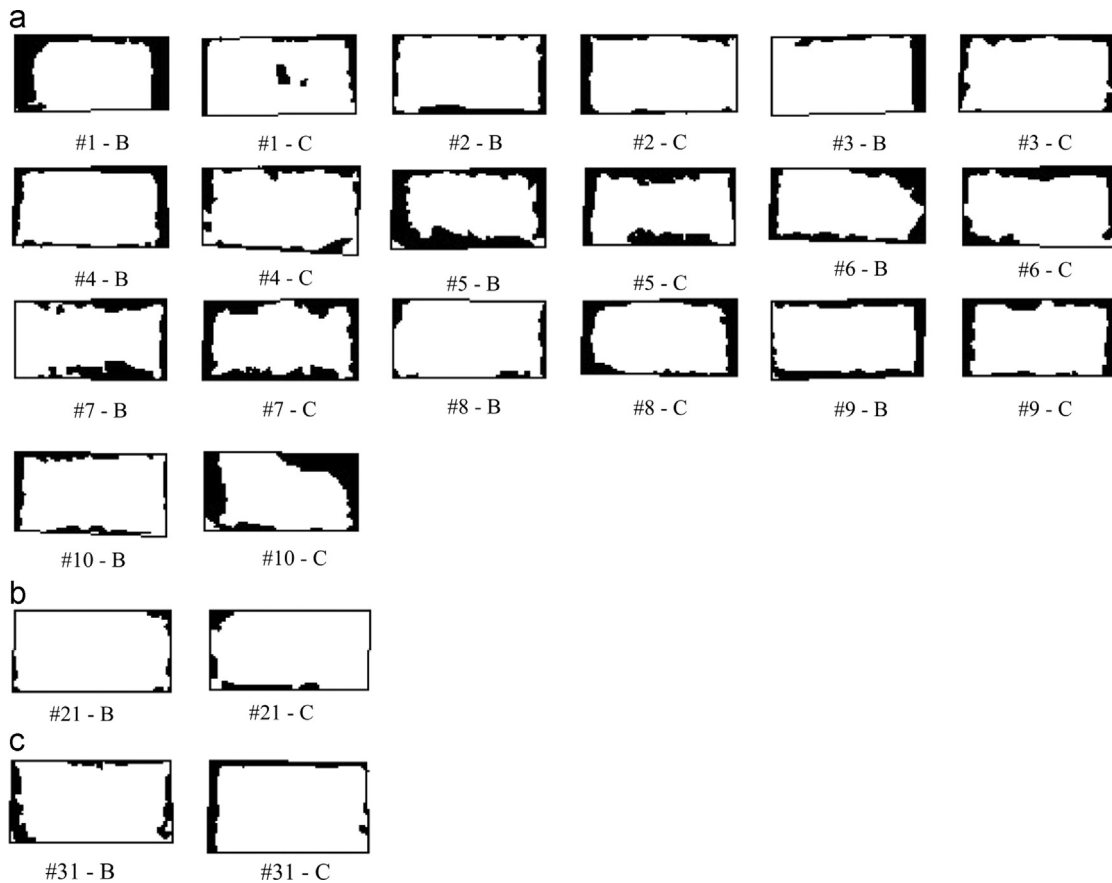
Binarized fracture surfaces. (a) Fracture surface images of 10 specimens at 293 K and 1 mm/min. Fracture surfaces of #1-B and -C were binarized from images in Fig. 6. (b) Fracture surface image of specimen with maximum apparent shear strength: 31.2 MPa (test condition: 203 K and 1.0 mm/min). (c) Fracture surface image of specimen having minimum apparent shear strength: 5.4 MPa (test condition: 423 K and 0.01 mm/min). Black and white regions in Fig. 8 denote adhesives on adherends and their surfaces. Here “#1-B” and “#1-C” mean fracture surfaces on Adherends B and C of specimen #1.
